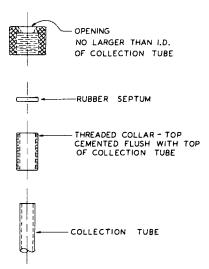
Retaining Rubber Septum for Gas Collection Tube
